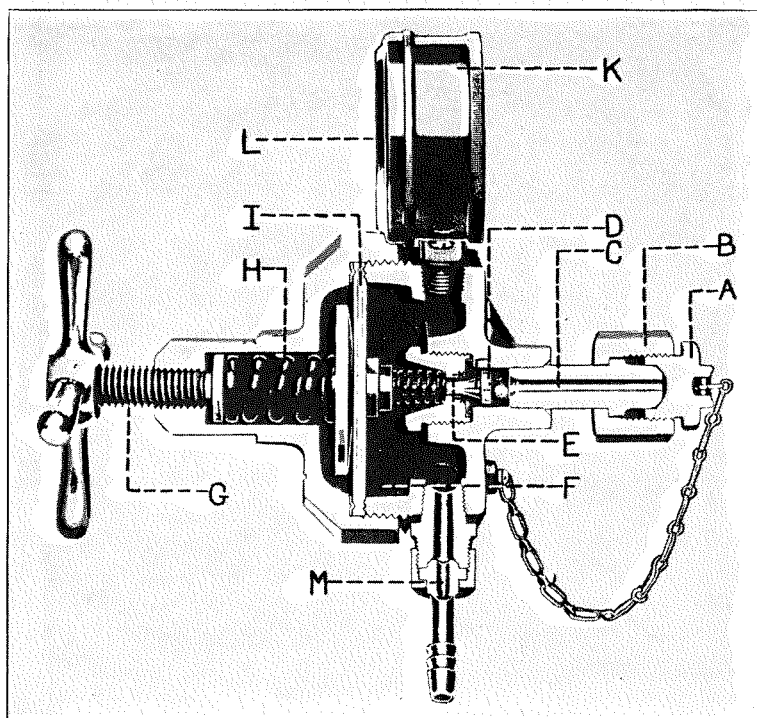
Mechanism for reducing high pressure in gas cylinders.
